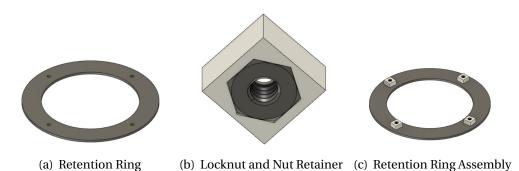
Renderings of retention ring, locknut, nut retainer, and full assembly of these components.
